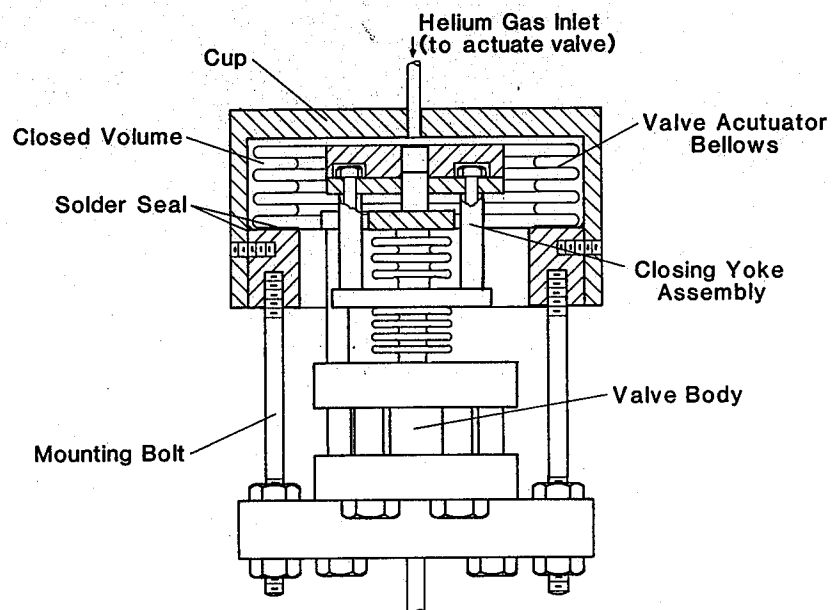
A cutaway drawing of the cryogenic actuator tested with the valve.
